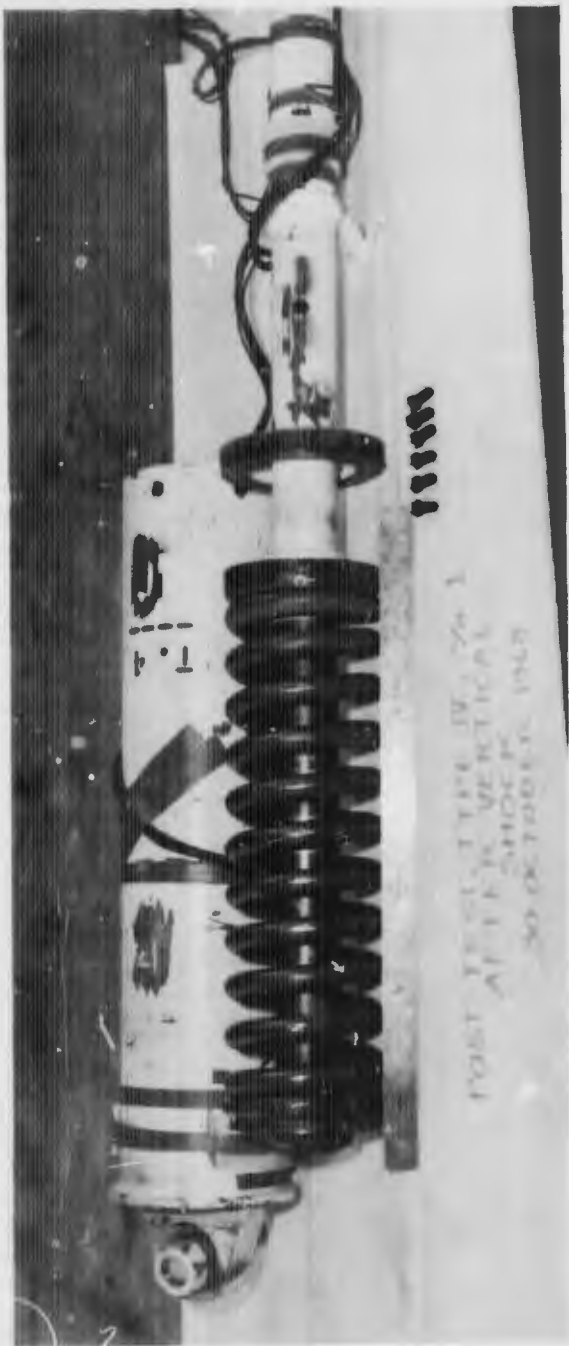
Type IV, S/N 1, Post-Test Inspection of Spring Assembly
